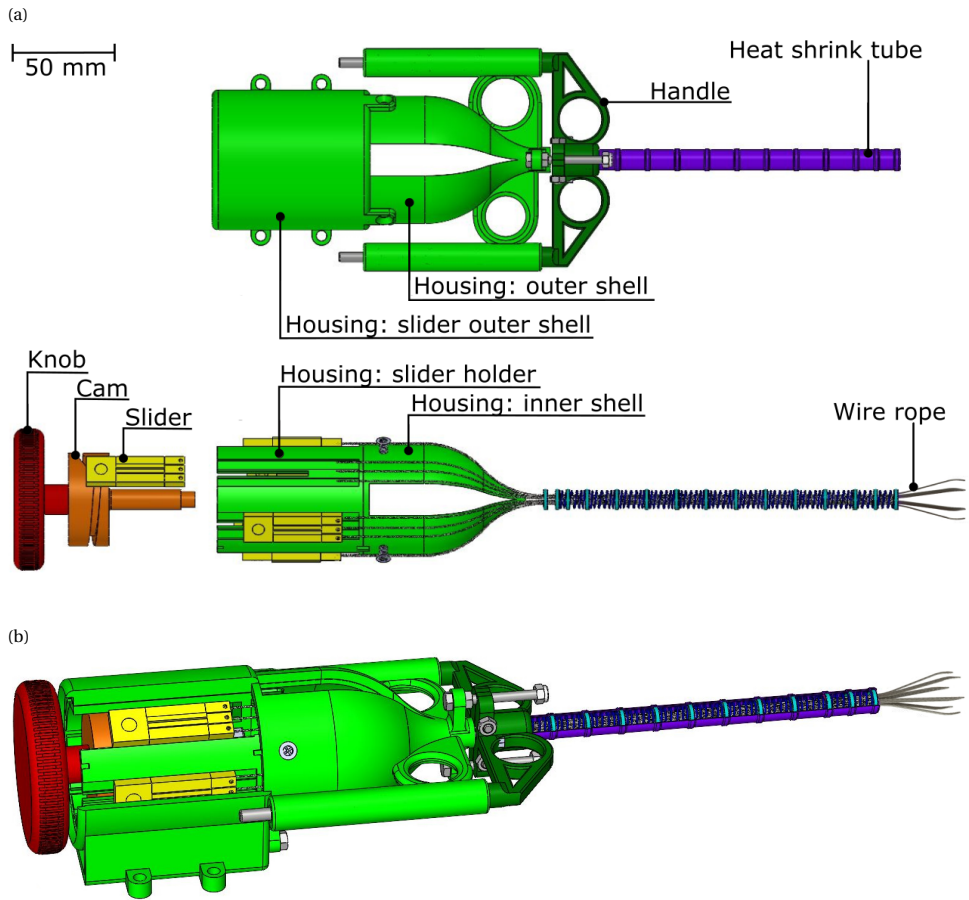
Exploded view (a) and assembly (b) of the actuation units of the gripper and the transport mechanism. The actuation unit consists of a rotary knob for actuation of the transport mechanism, cam, six sliders connected to the wire ropes of the gripper using a set screw, housing, and handle for voluntary opening of the gripper.
